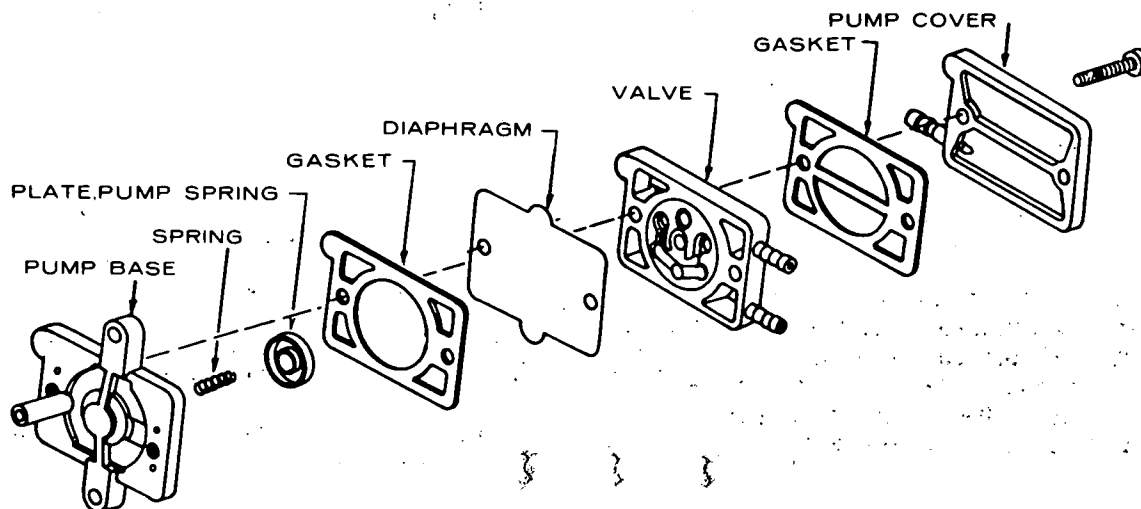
EXPLODED VIEW OF FUEL PUMP
